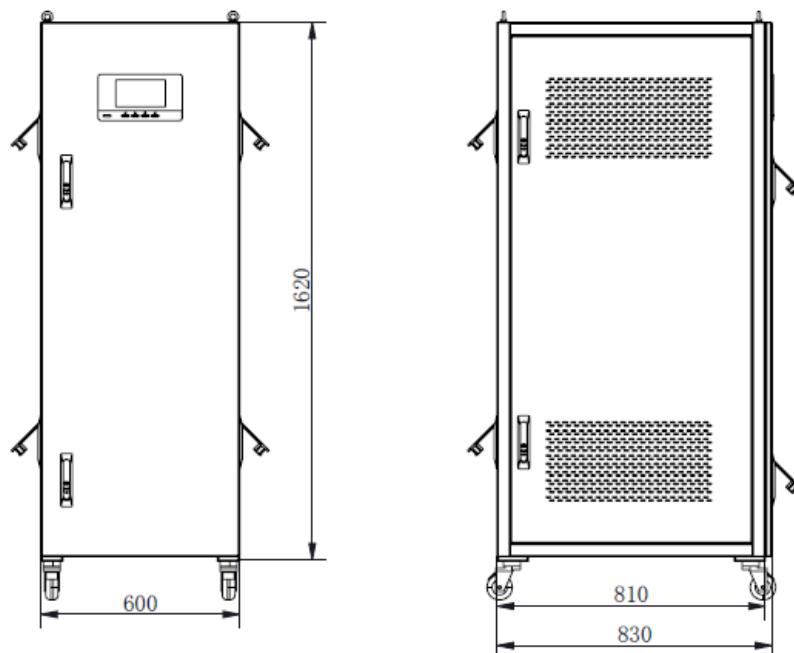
Major Dimensions of the Inset Light FixtureFigure 4 – Major Dimensions of the Branch Control BoxFigure 5 – Major Dimensions of the Main Control Cabinet
